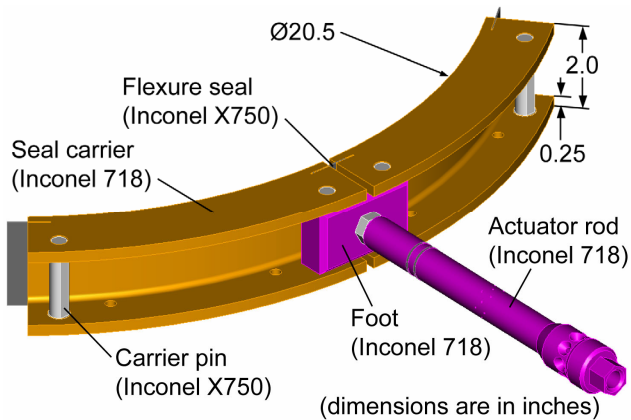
Actuator rod foot, two adjacent seal carriers, flexure seals, materials, and nominal dimensions in inches.
